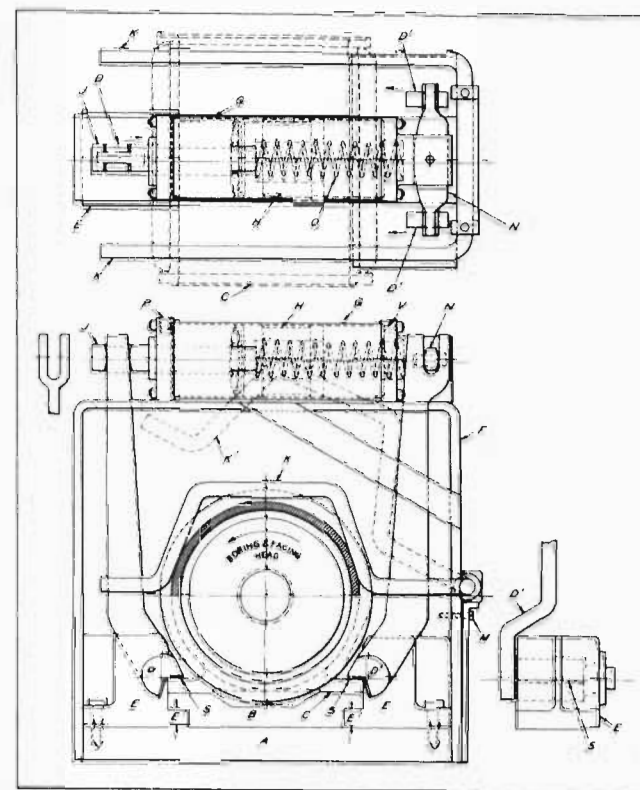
Cylinder boring fixture equipped with air-operated equalizing clamping levers.
